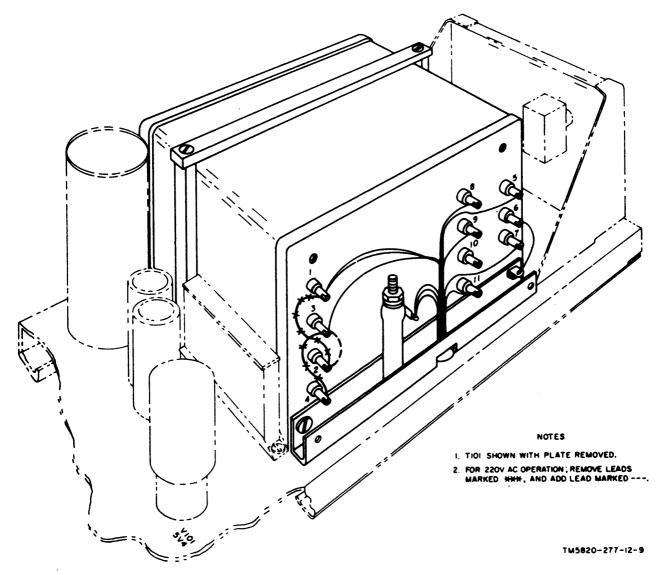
O-330B/FR, primary power conversion connections, power supply transformer.
